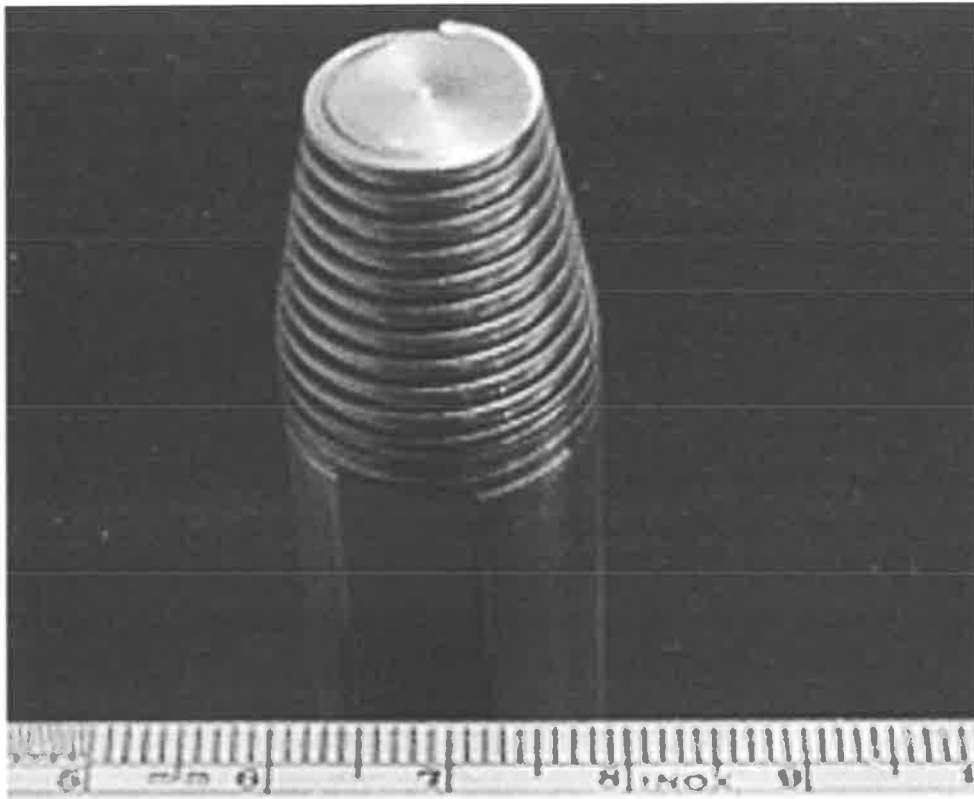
Weld pin CT1-20 used to produce weld 215B
